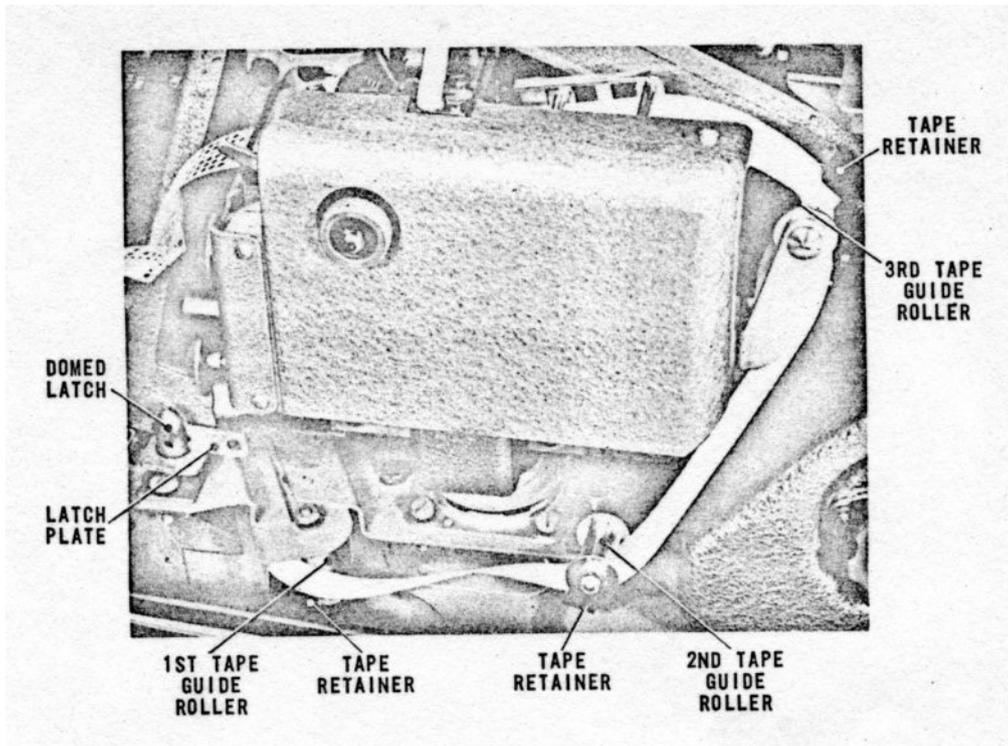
TAPE PATH—RIGHT-HAND VIEW
